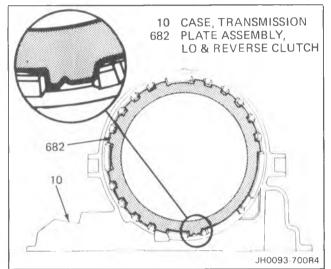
Lo and Reverse Clutch Plates Properly Installed
